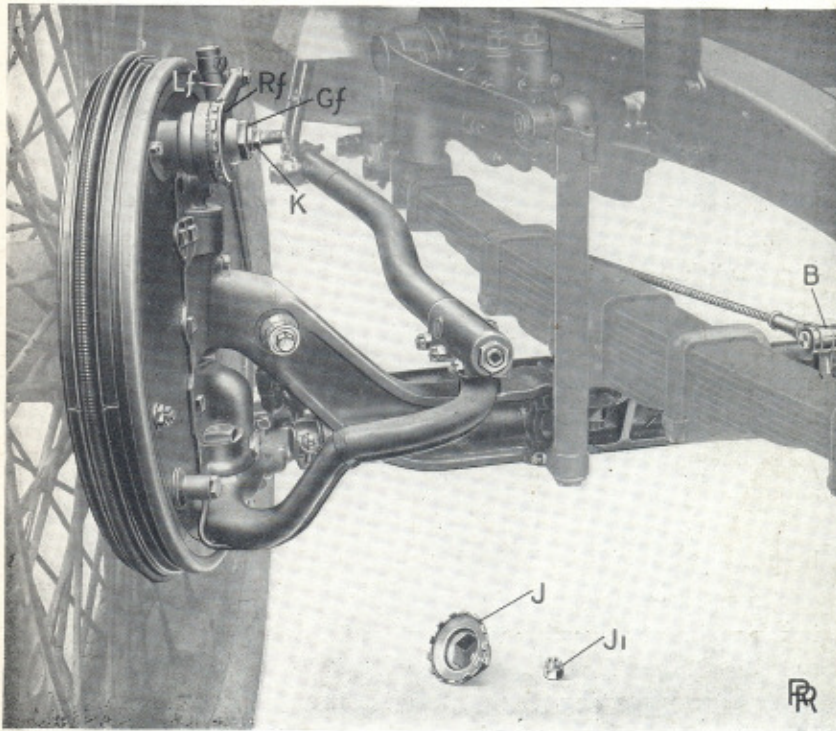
FRONT WHEEL BRAKE ADJUSTMENT.
